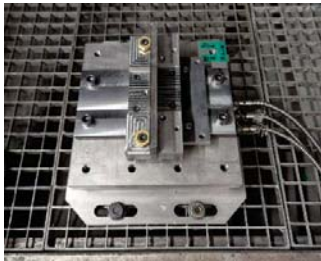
Clamping fixture and force sensor. Depending on the use case the work piece will be clamped differently. The fixture itself is thermally insulated from the force sensor.
